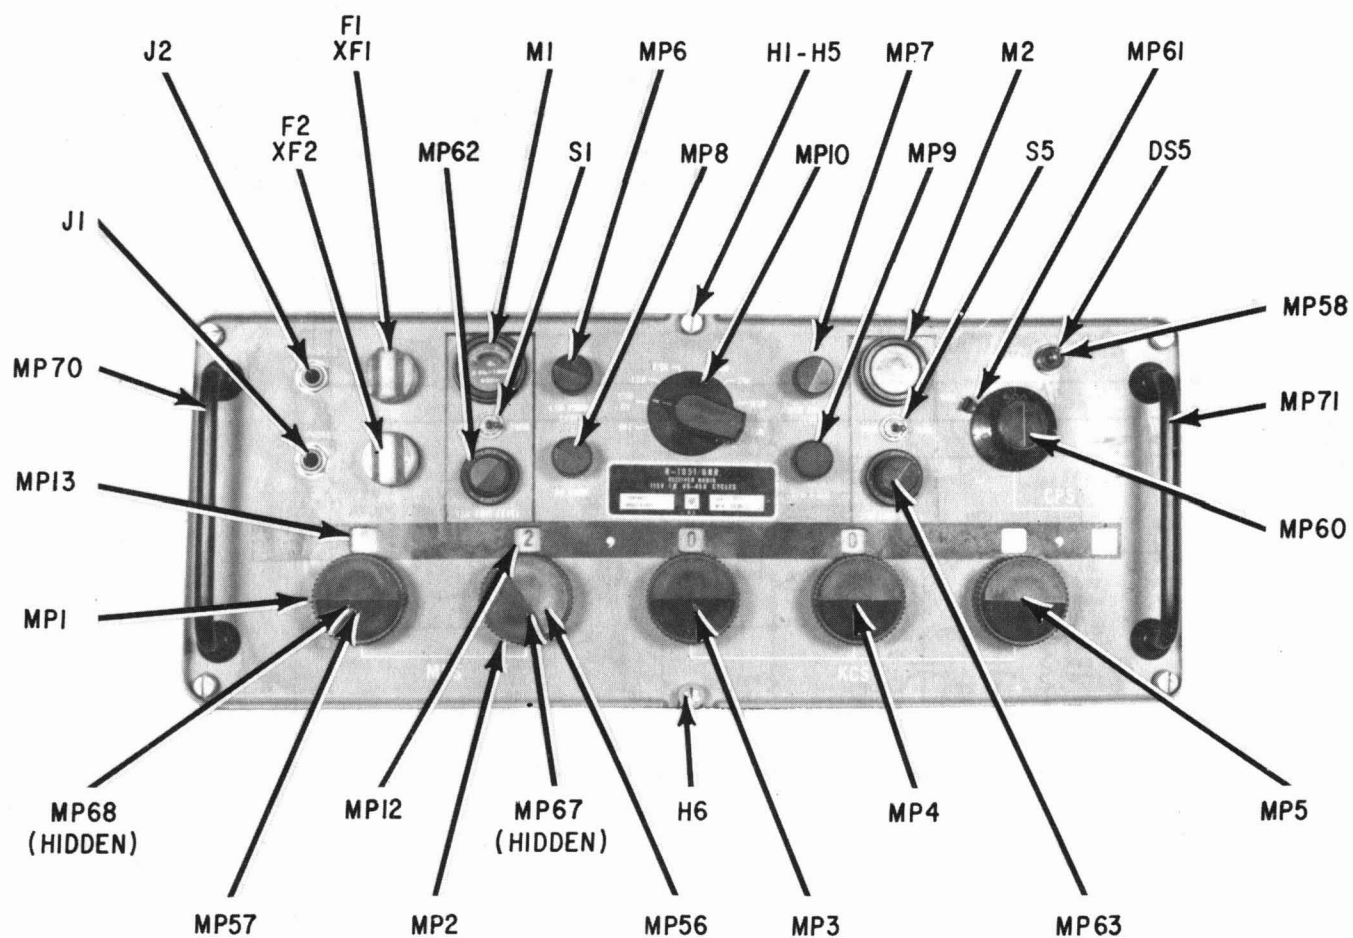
R-1051 Front Panel Assembly Front View, Component Location
